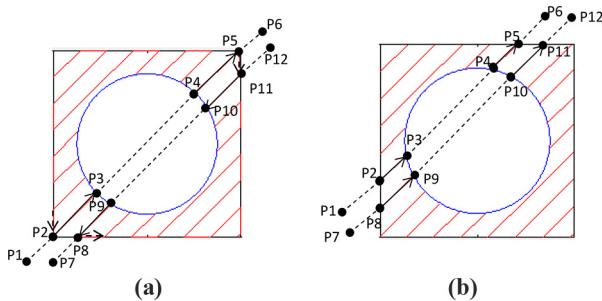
(a) Zigzag tool path and (b) parallel tool path for the outside part of horizontal gradient scaffold
